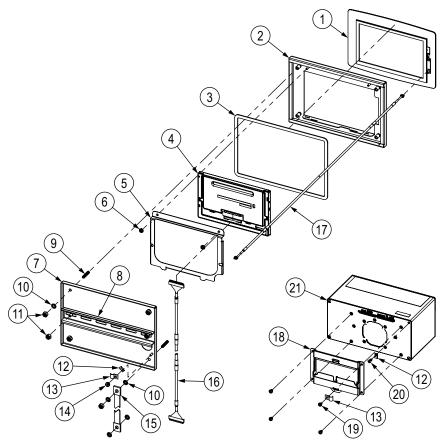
7 Inch Touch-Only Panel Mount Repair Parts
